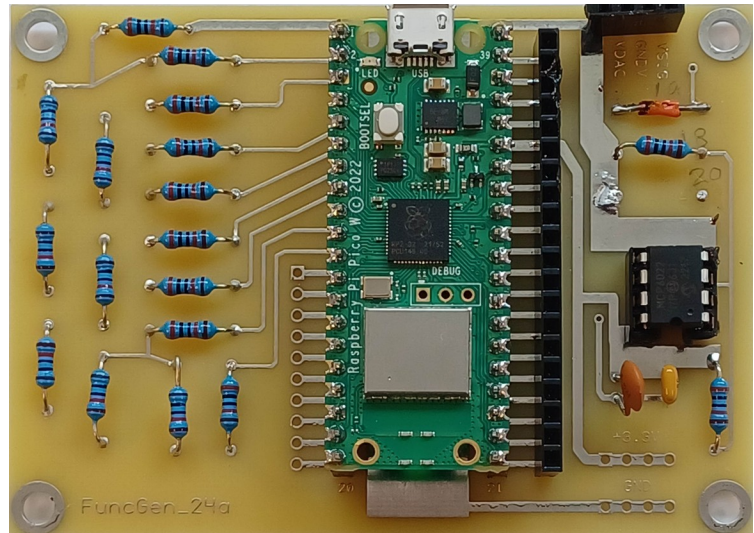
Finished PCB. The Pico W and the op amp are mounted in their sockets.
